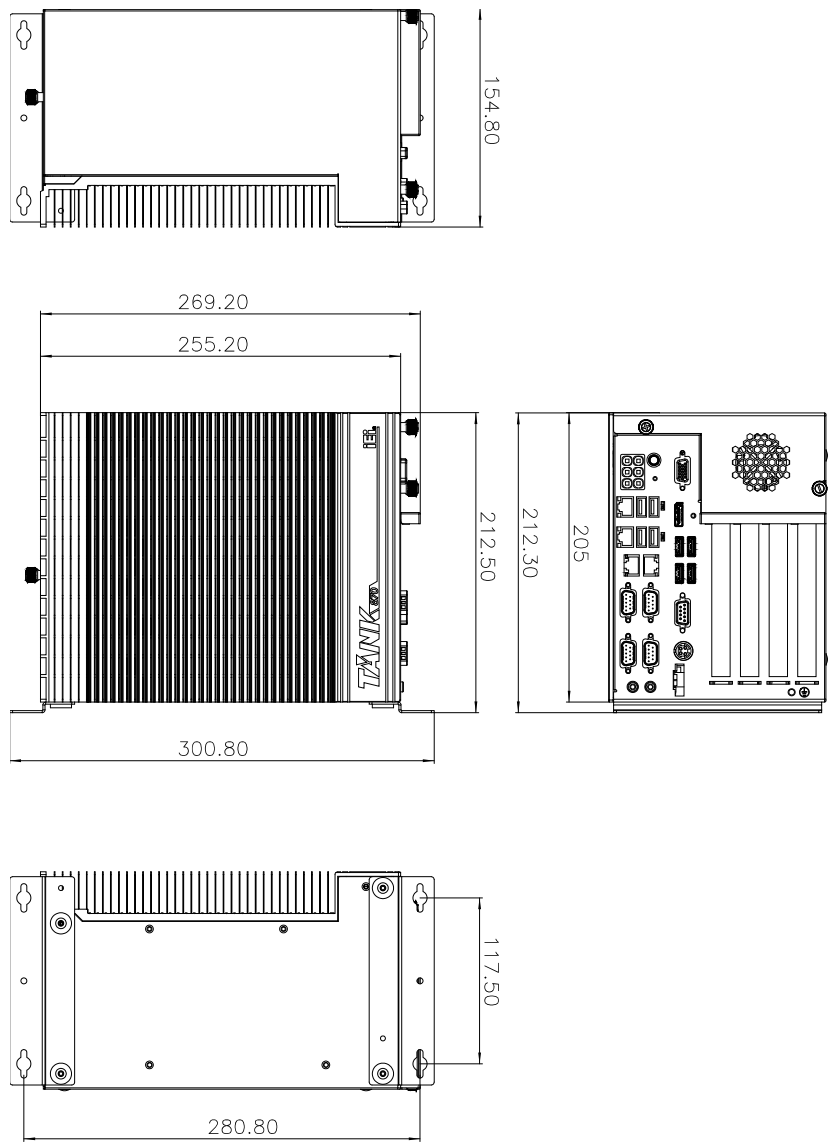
TANK-870-Q170-4 slot Physical Dimensions (millimeters)
